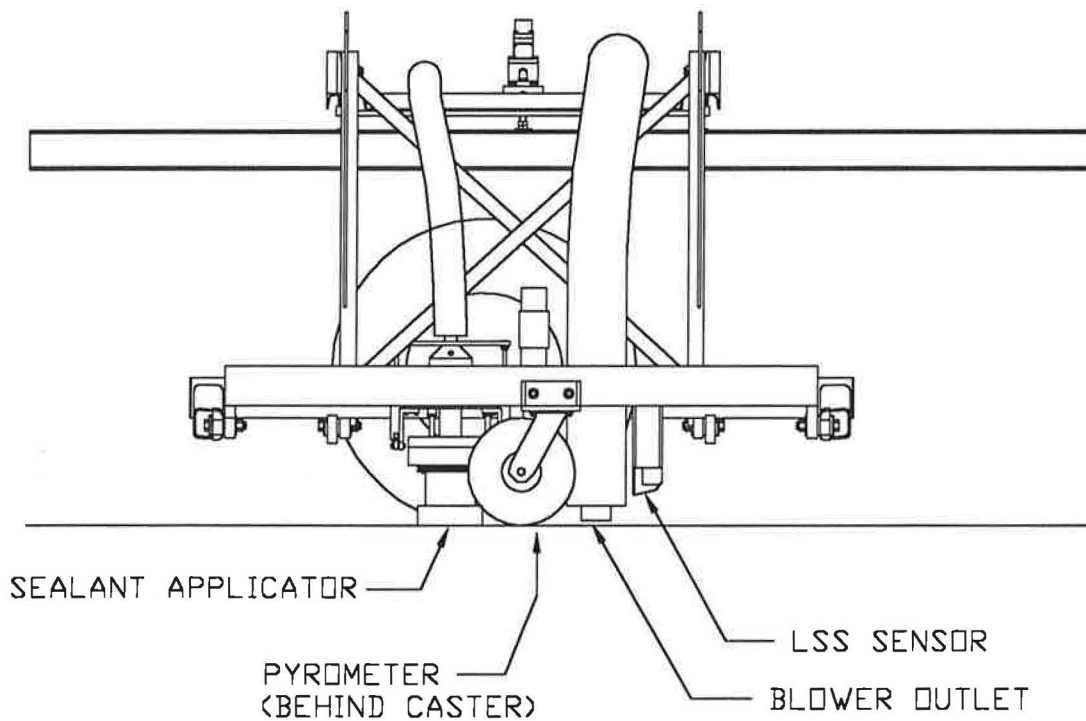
Drawing of the component configuration on the longitudinal robot positioning system without the router.
